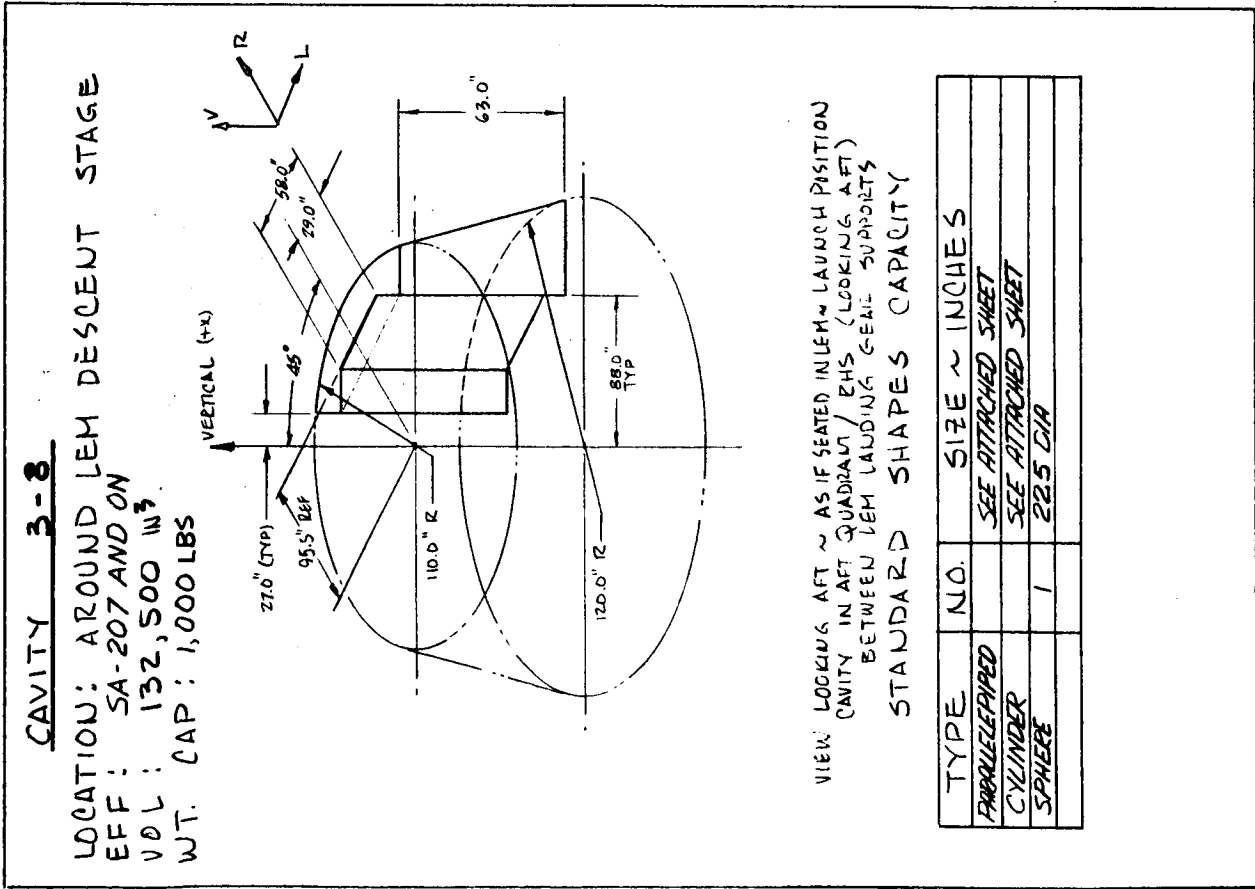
DESCRIPTIVE DRAWING - CAVITY 3-8
